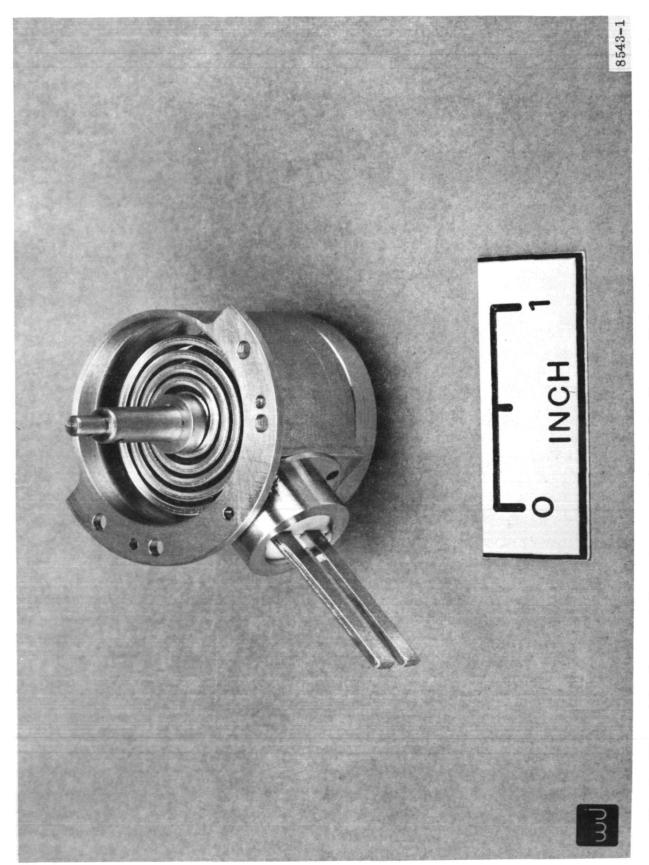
View of the thermostatic motor assembly showing the parallel motor elements and insulating ceramic.
